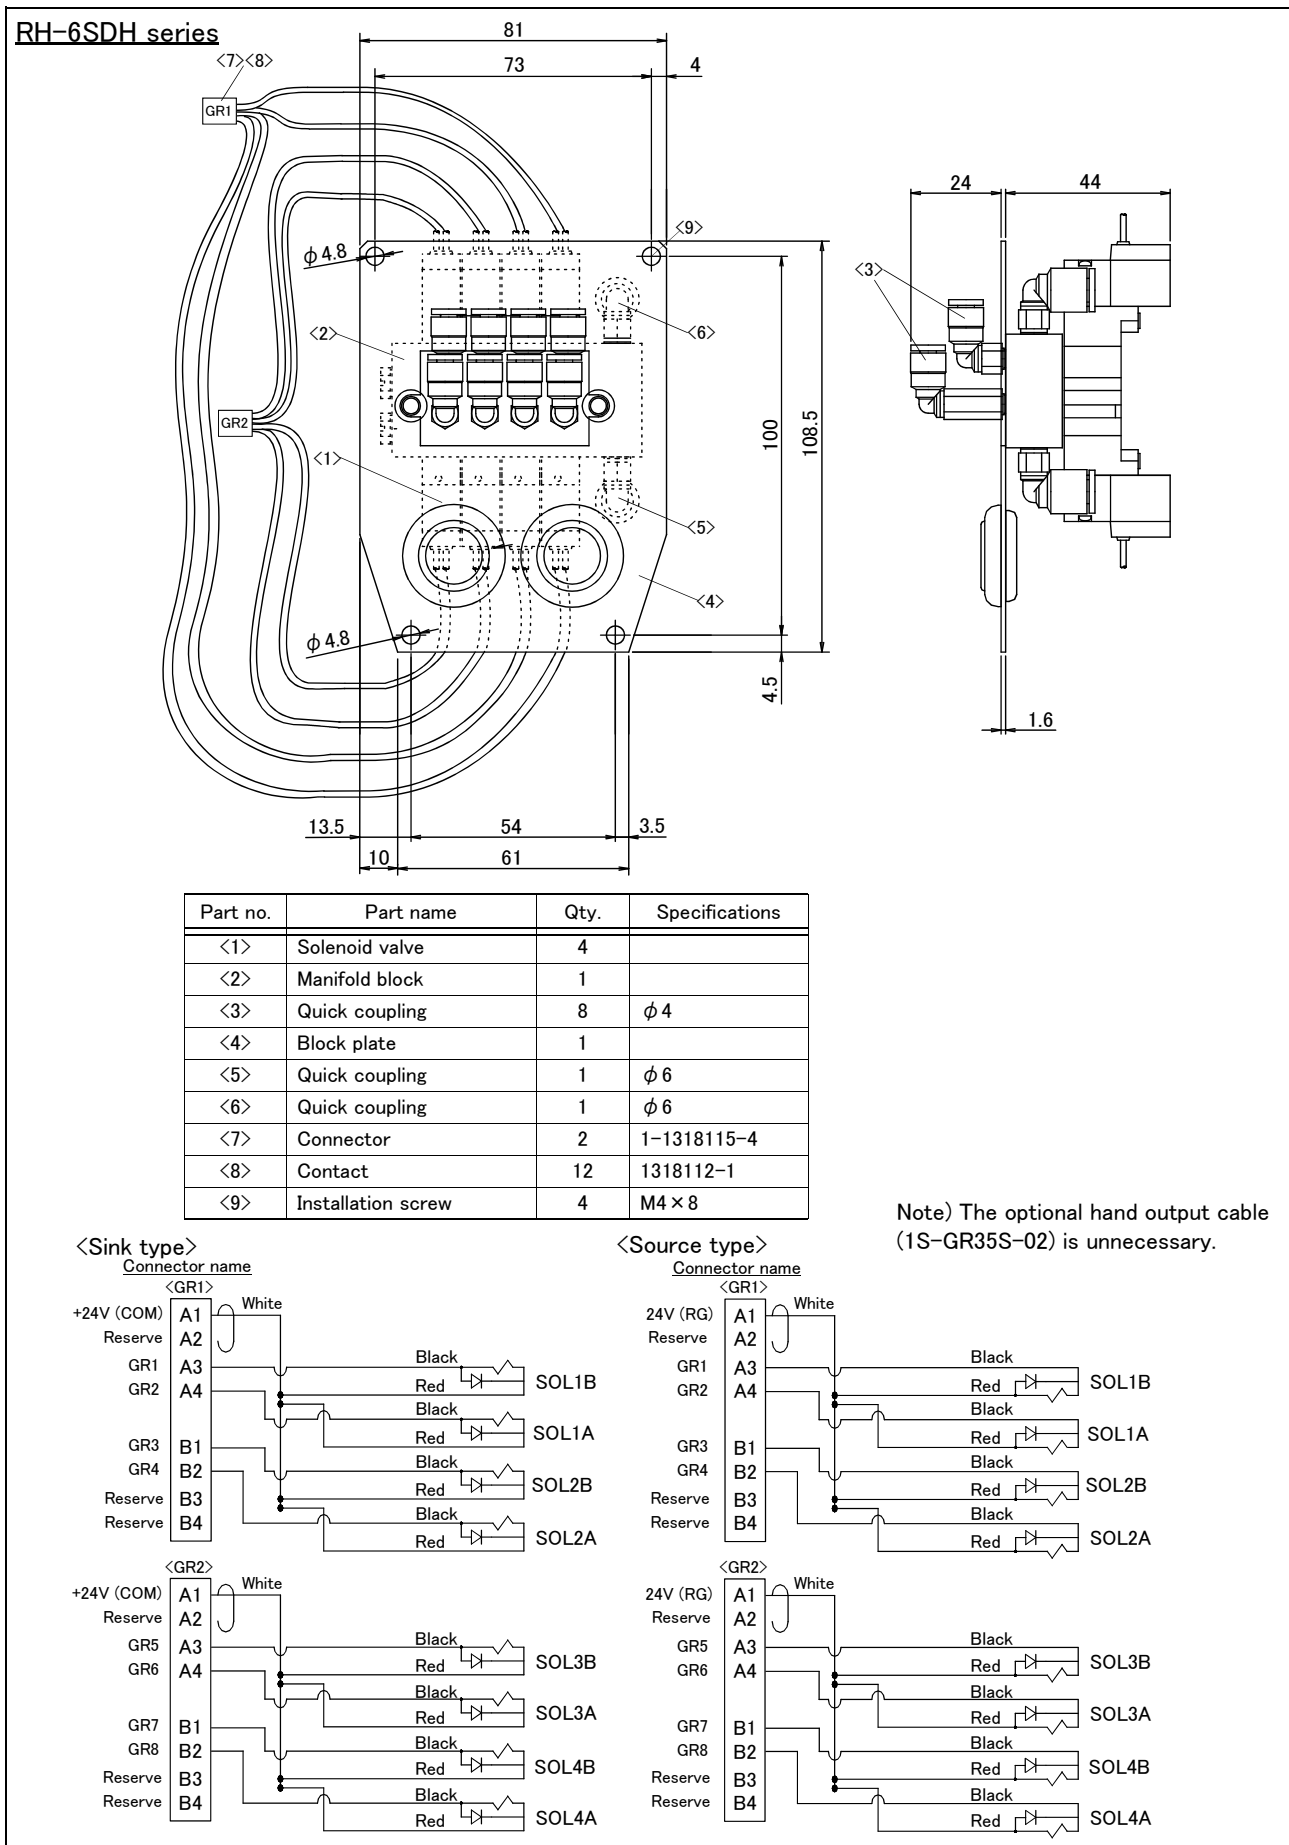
Outline dimensional drawing (RH-6SDH series)
